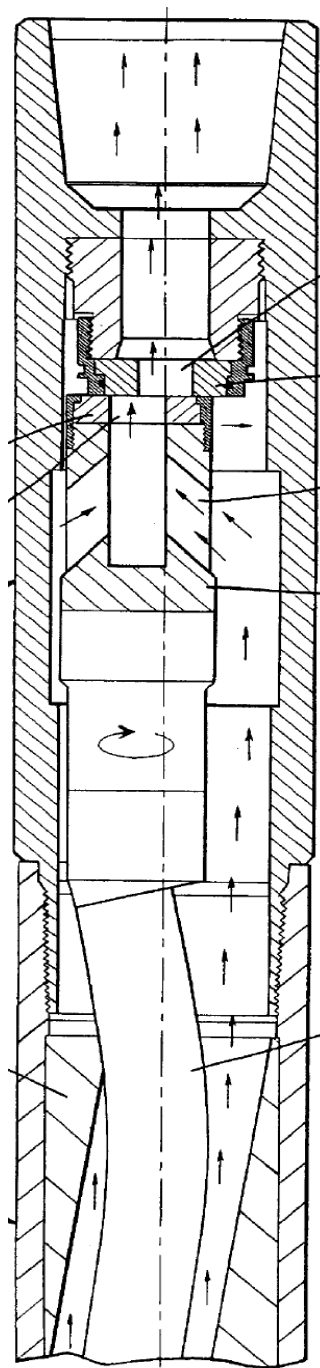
Schematic illustration of the valve assembly operating mechanism [29]
